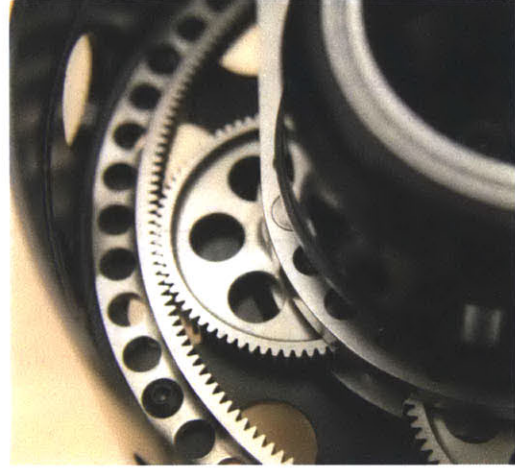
Closeup photo of the gearbox as assembled in the front leg.
